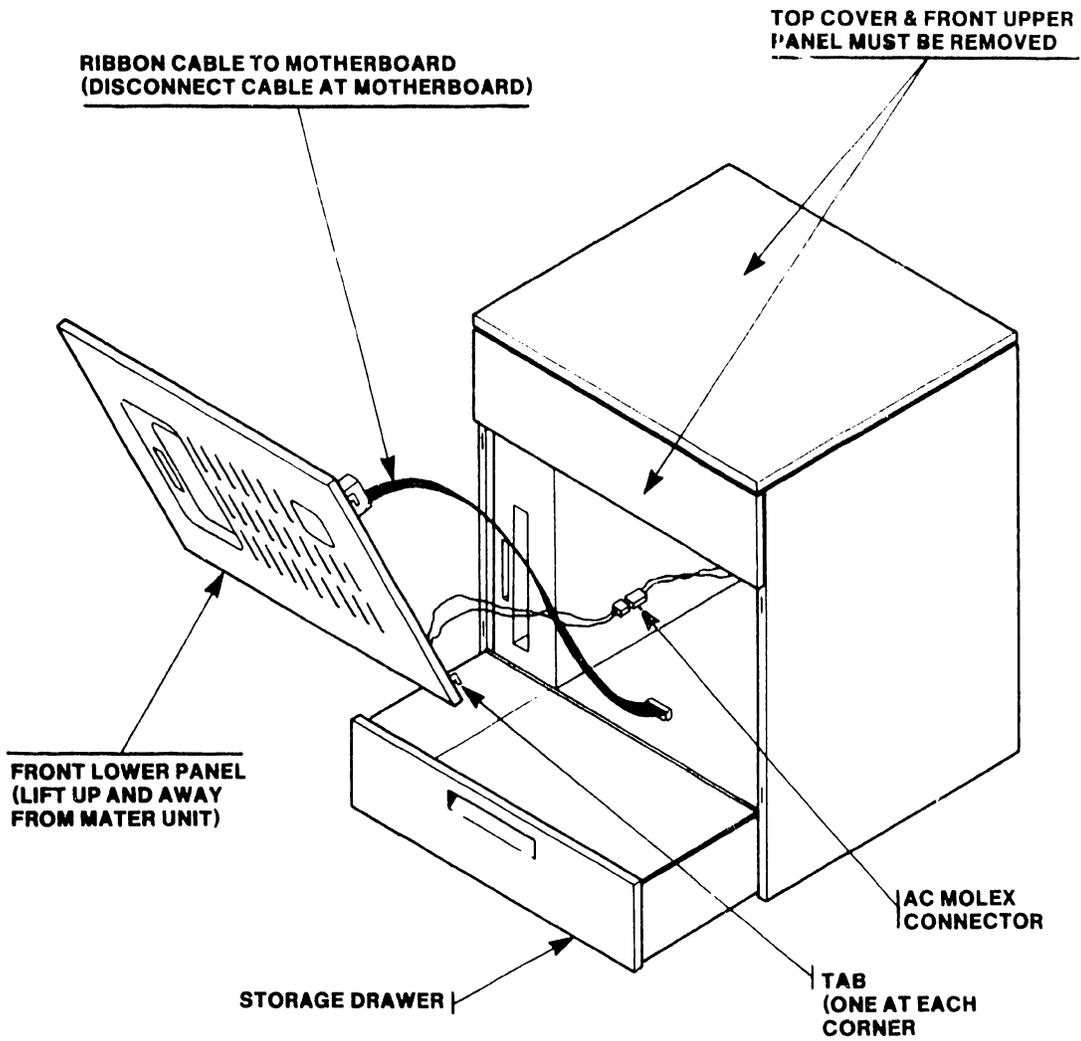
REMOVING MASTER UNIT LOWER FRONT PANEL
